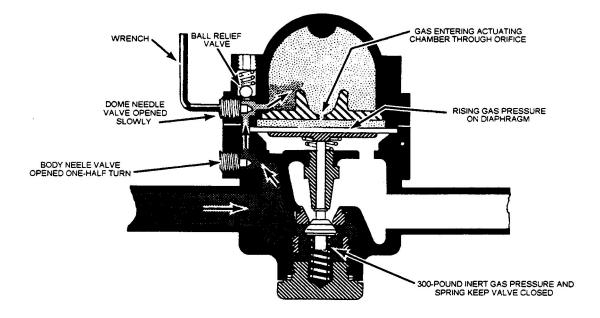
Adjusting the inert-gas-pressure regulating valve.
